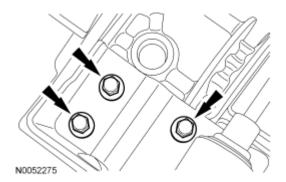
Locating Starter Motor Electrical Terminal Cover Courtesy of FORD MOTOR CO.
